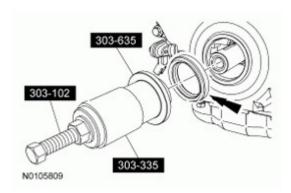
Installing Crankshaft Front Seal Using Crankshaft Front Oil Seal Installer Courtesy of FORD MOTOR CO.
